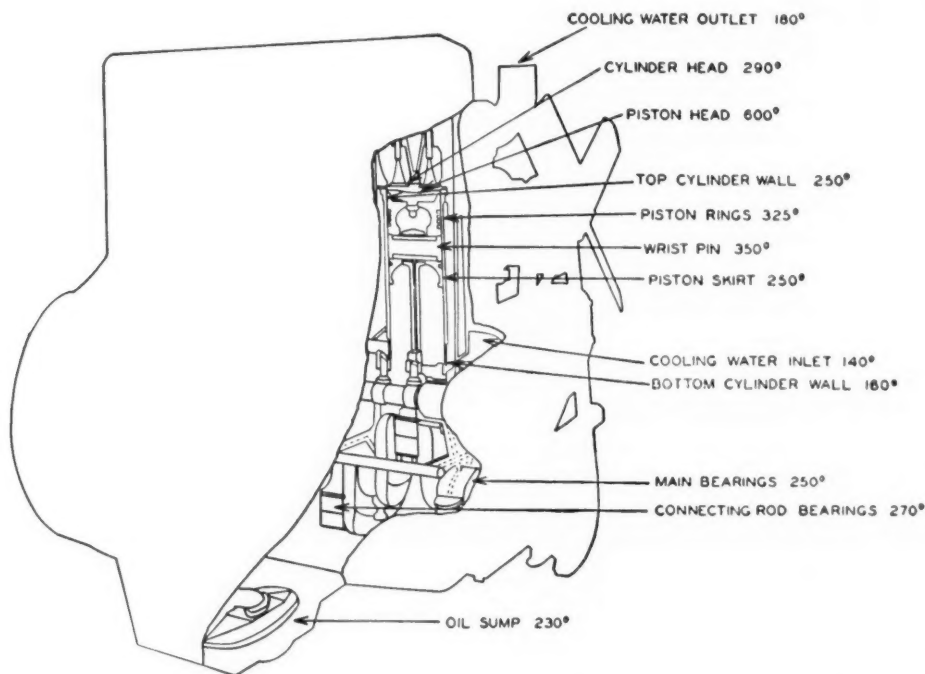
Some details of a heavy-duty automotive type engine showing average temperatures at those points where lubrication is important, or where the lubricant might be affected by improper cooling.
